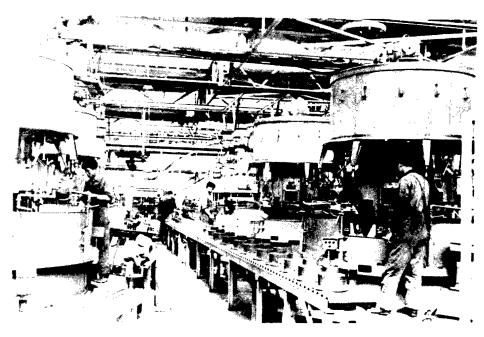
Communist China: Machining of Transmission Parts by Multiple-Spindle Vertical Semiautomatic Lathes in the Ch'ang-ch'un Automobile Plant No. 1
